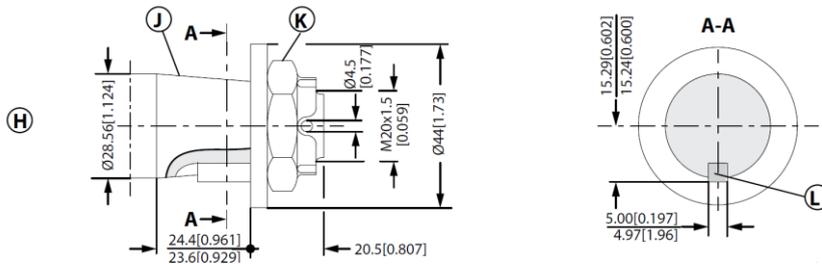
OMR shaft version: Tapered shaft 28.5 mm; ISO/R775 (taper 1:10)
